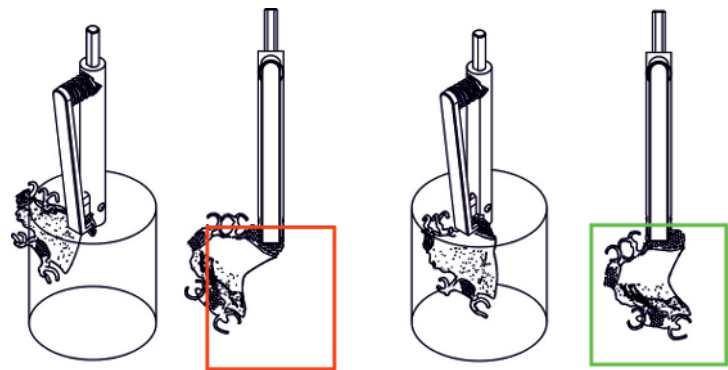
Envelope-shape geometry for permitted workpiece size and for securing workpieces, example
